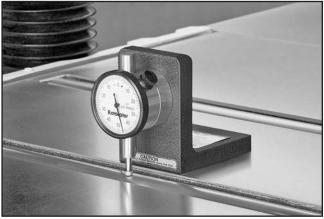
W1218A Rotacator™ Precision Planer Tool.
